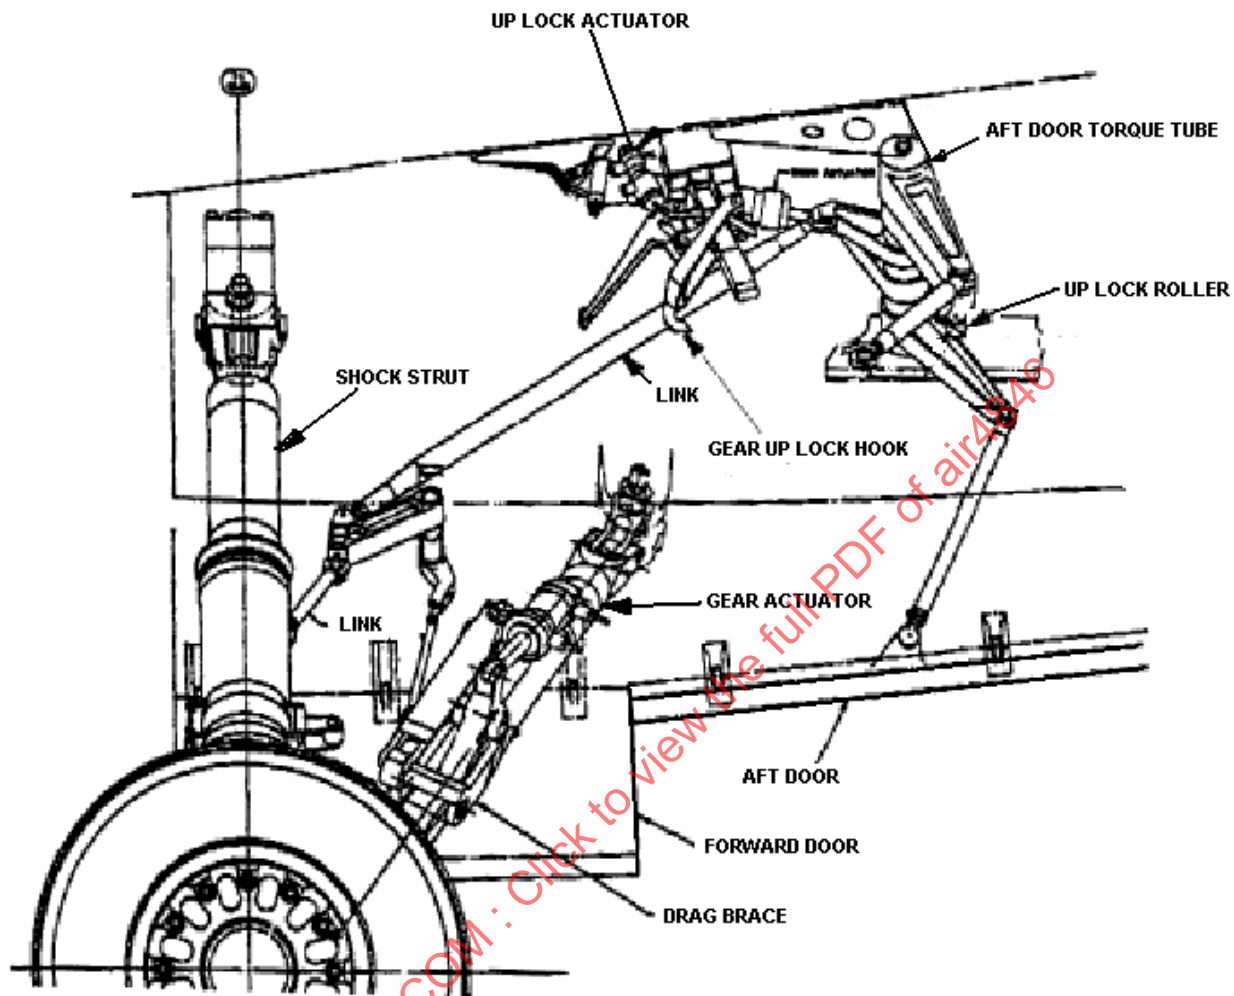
SIDE VIEW S-3A MAIN LANDING GEAR
